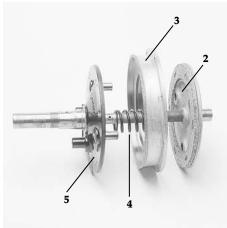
Inner driving plate (2) and outer driving plate (5) that carry servo linings, spring (4) that separates inner and outer driving plates and disc drum (3).
